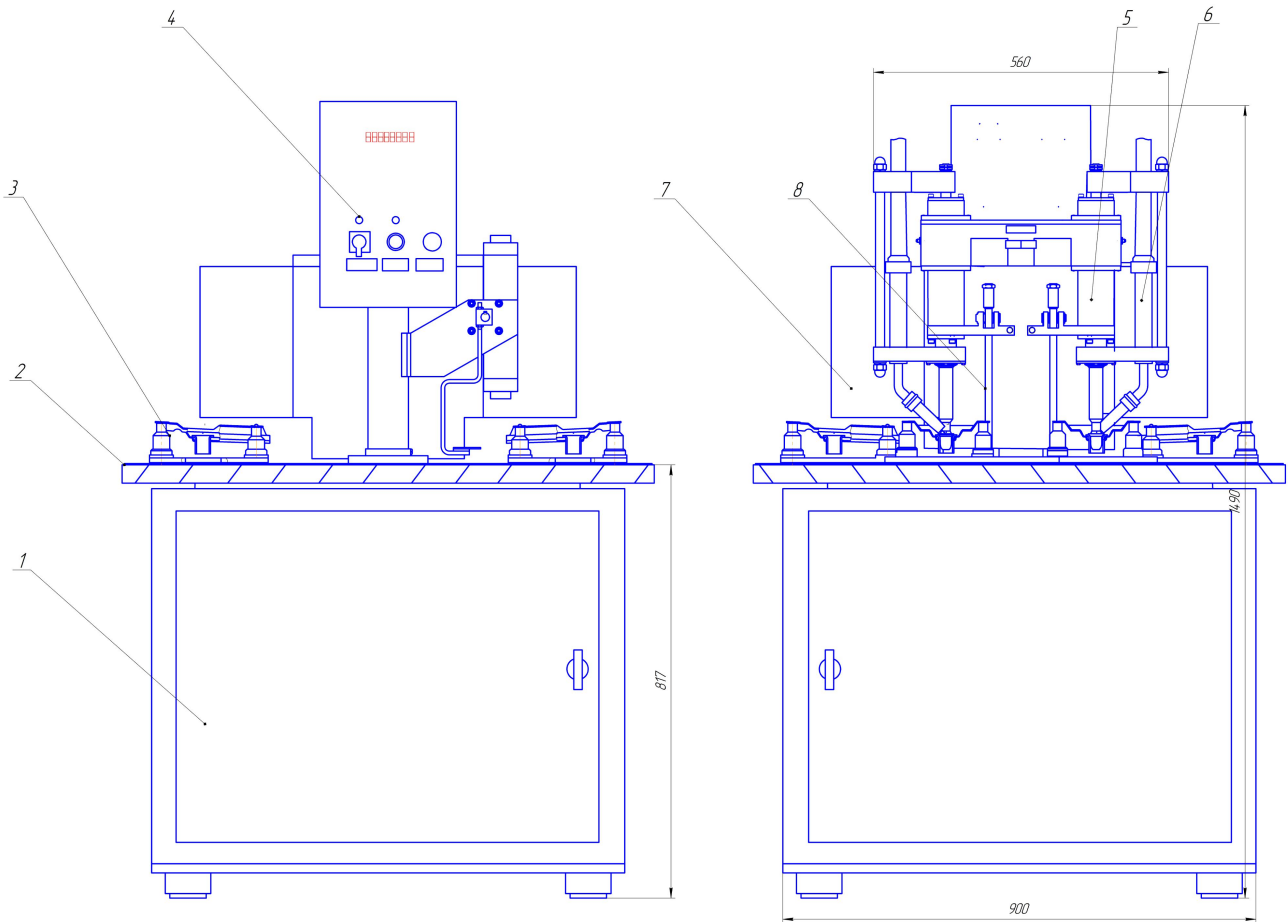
General appearance of the welding installation: 1 - base; 2 - returning table; 3 - workpiece; 4 - control panel; 5 - two rotation of the welding head; 6 - welding head; 7 - protective shield; 8 - rail of the lowering of the welding head
